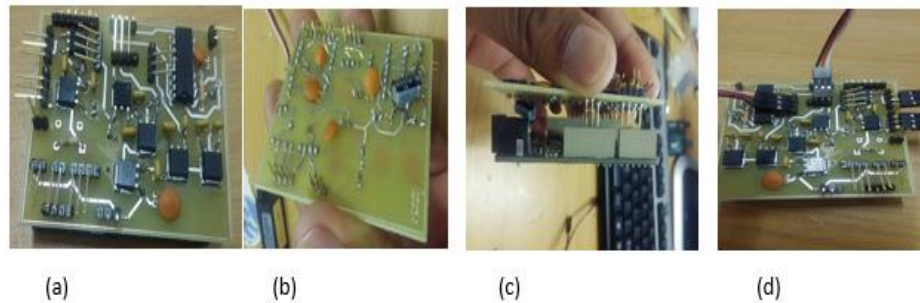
Motor and sensory PCB (a) Top view (c) Bottom view (d) Connecting the PCB to arduino m0 pro (d) Connecting motor and sensors example
